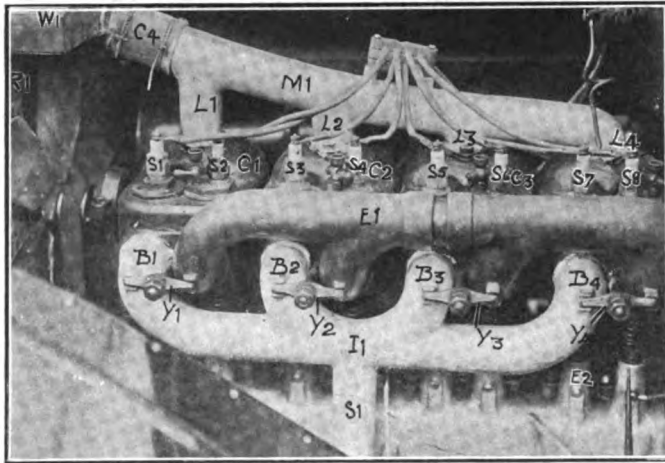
Looking at the left-hand side of four-cylinder motor, showing the intake and exhaust manifolds, water connection, etc.
